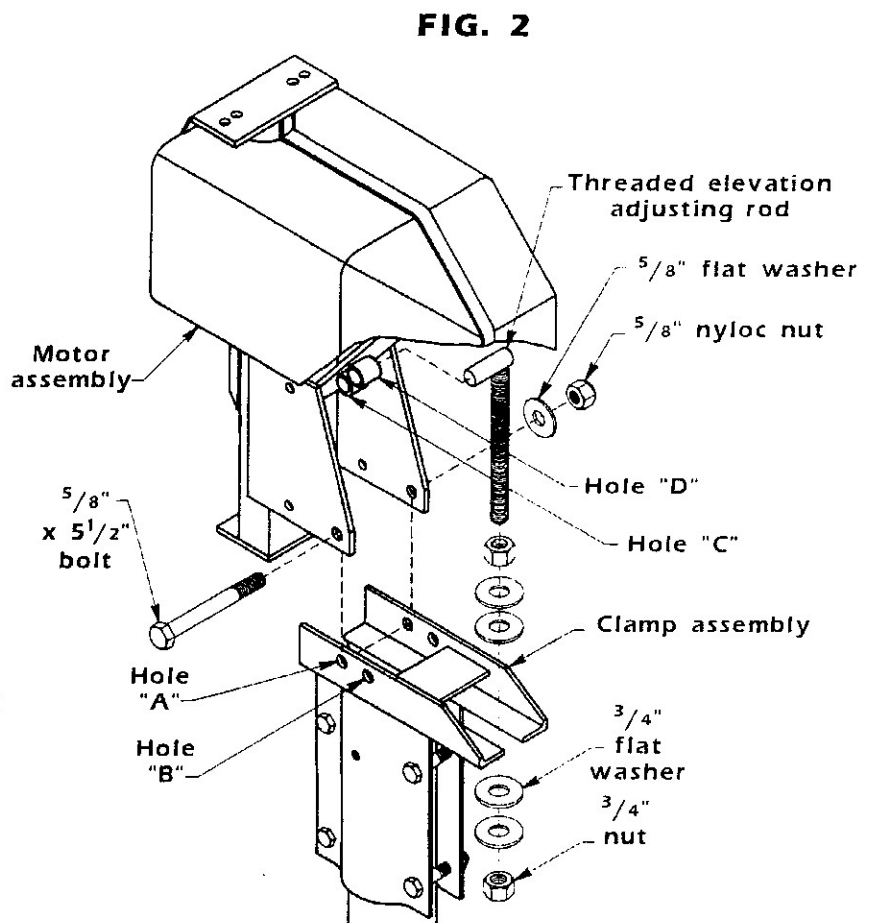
for correct hole to insert threaded elevation adjusting rod.
